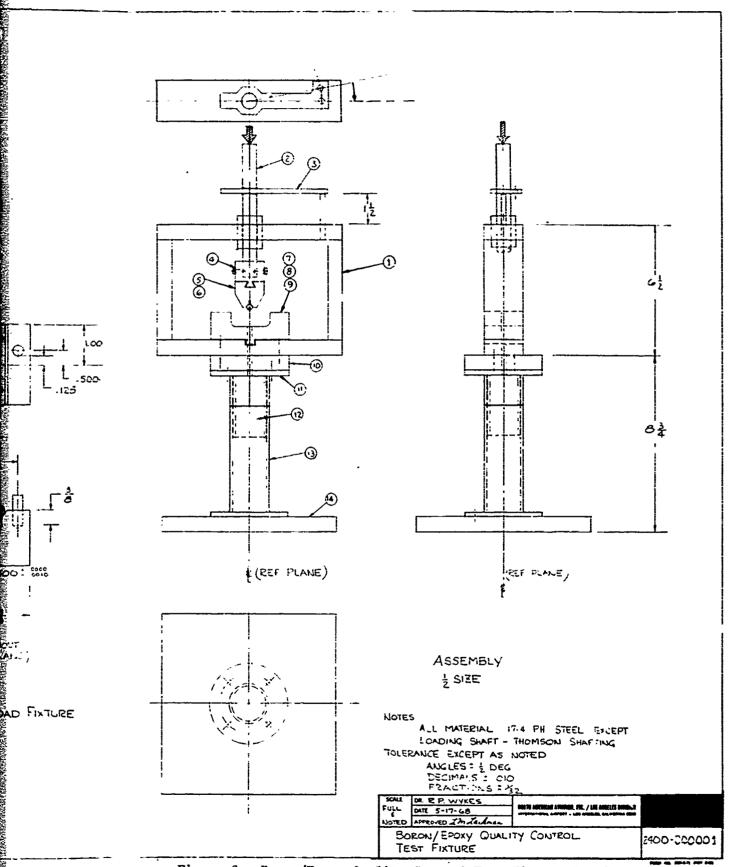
Boron/Epoxy Quality Control Test Fixture Drawing
